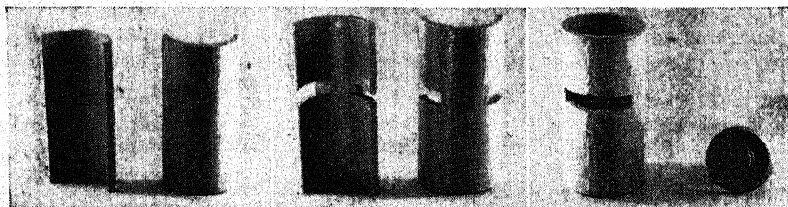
left, cylinder halves; center, cylinder halves with slots for ports; right, cylinder halves welded together and head end counterbored for cylinder head at right.
